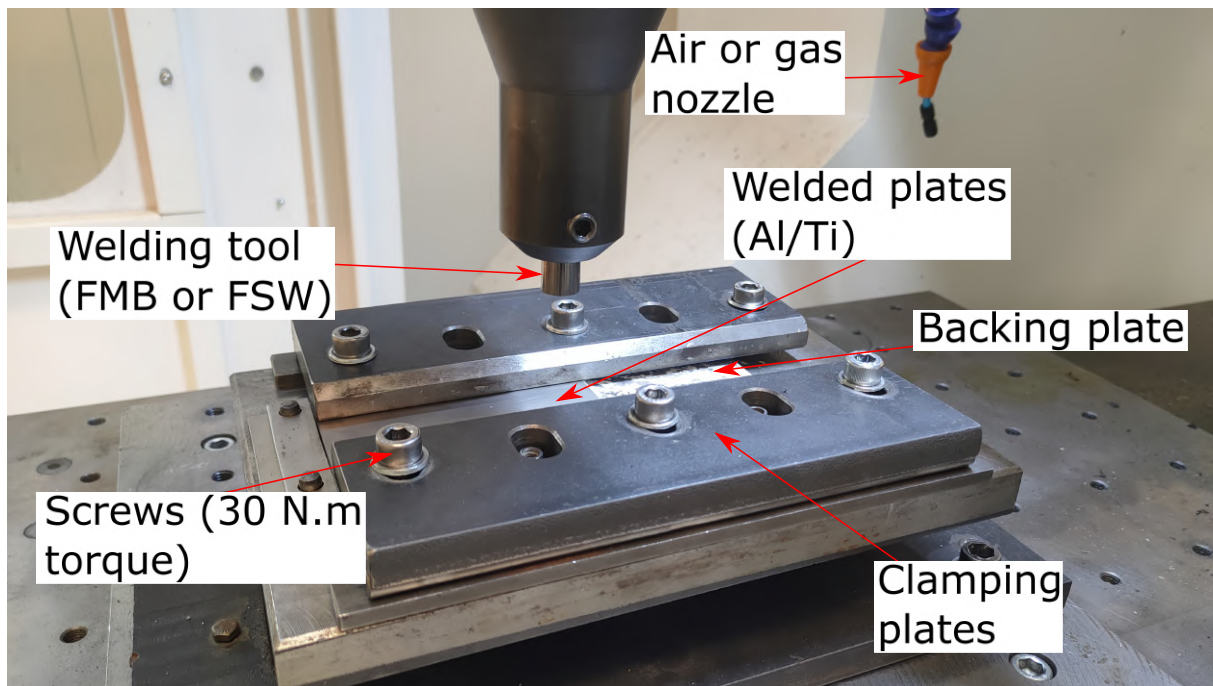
Picture of the welding apparatus for dissimilar AA6061-T651 and Ti-6Al-4V. Here a different tool is installed instead of the FSW Al/Ti tool.
